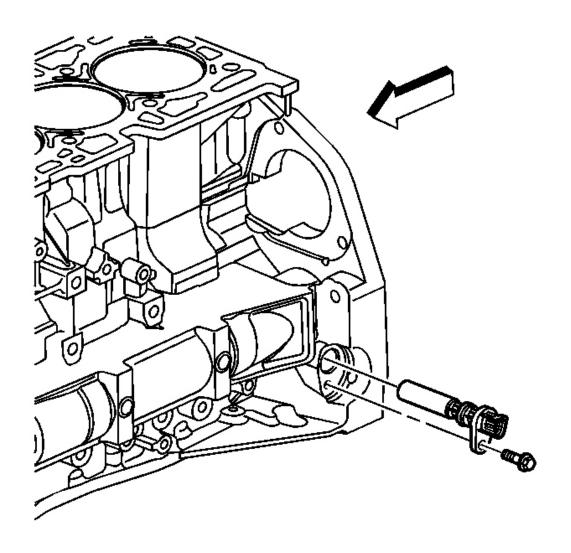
View Of Crankshaft Position Sensor Courtesy of GENERAL MOTORS CORP.
